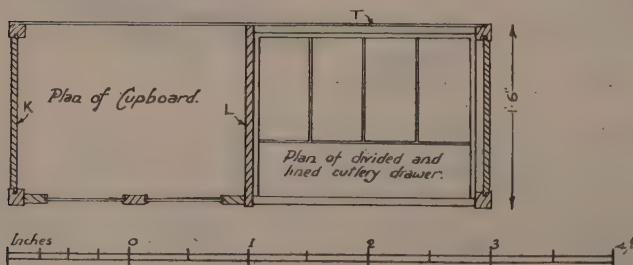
HALF PLANS OF CUPBOARD AND CUTLERY DRAWER.
